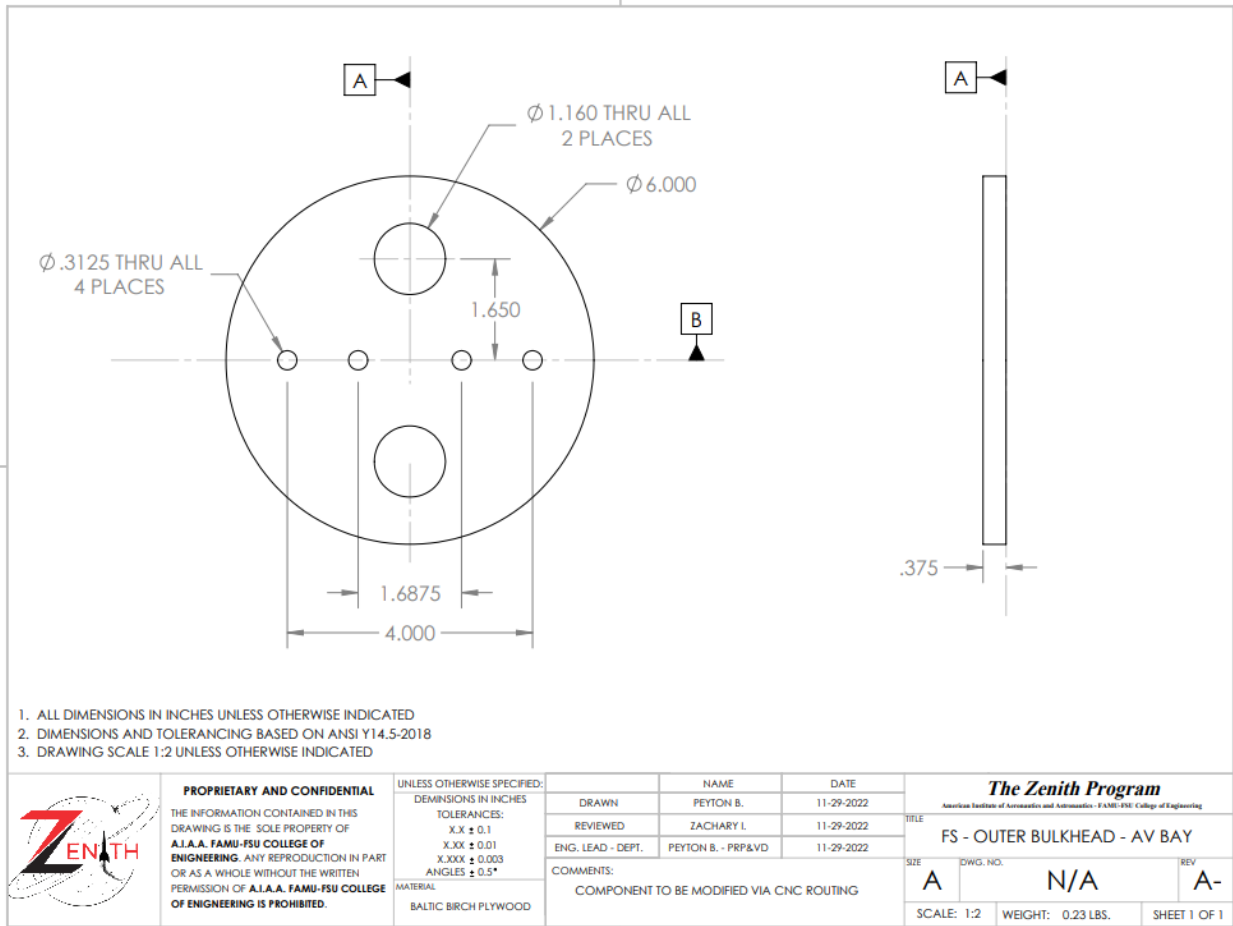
AV Bay Outer Bulkhead CAD Drawing
